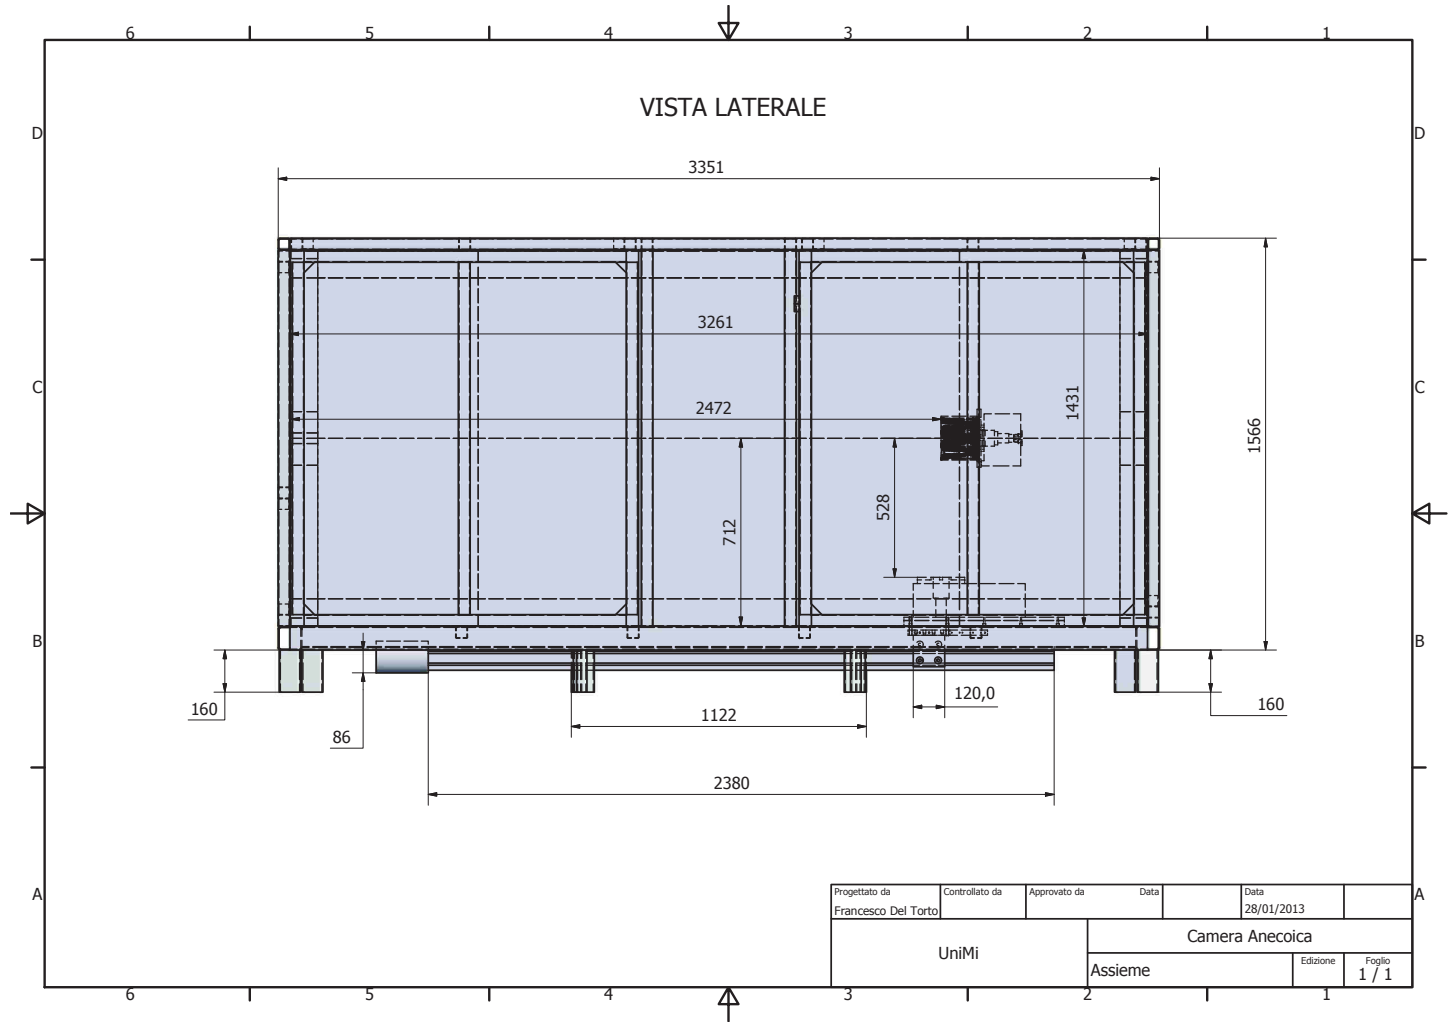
CAD drawing of the lateral view of the anechoic chamber.
